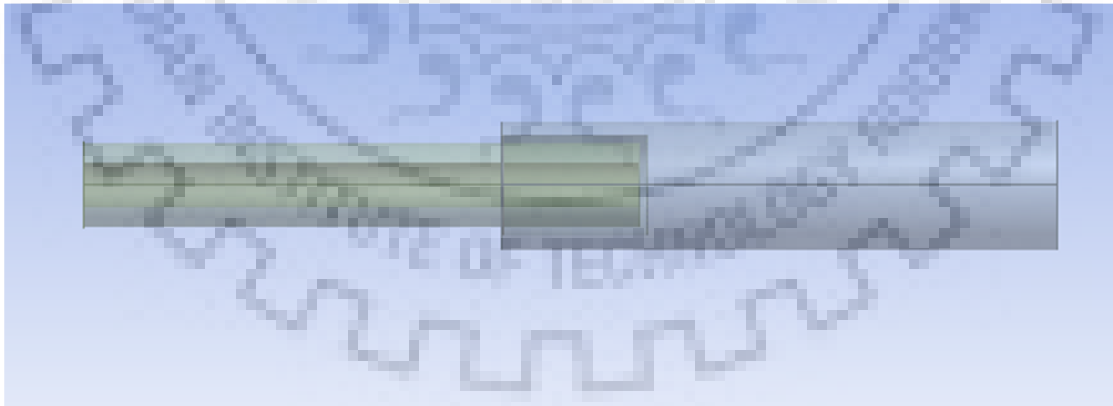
Side view of tool engulfed inside tool at depth 10mm
